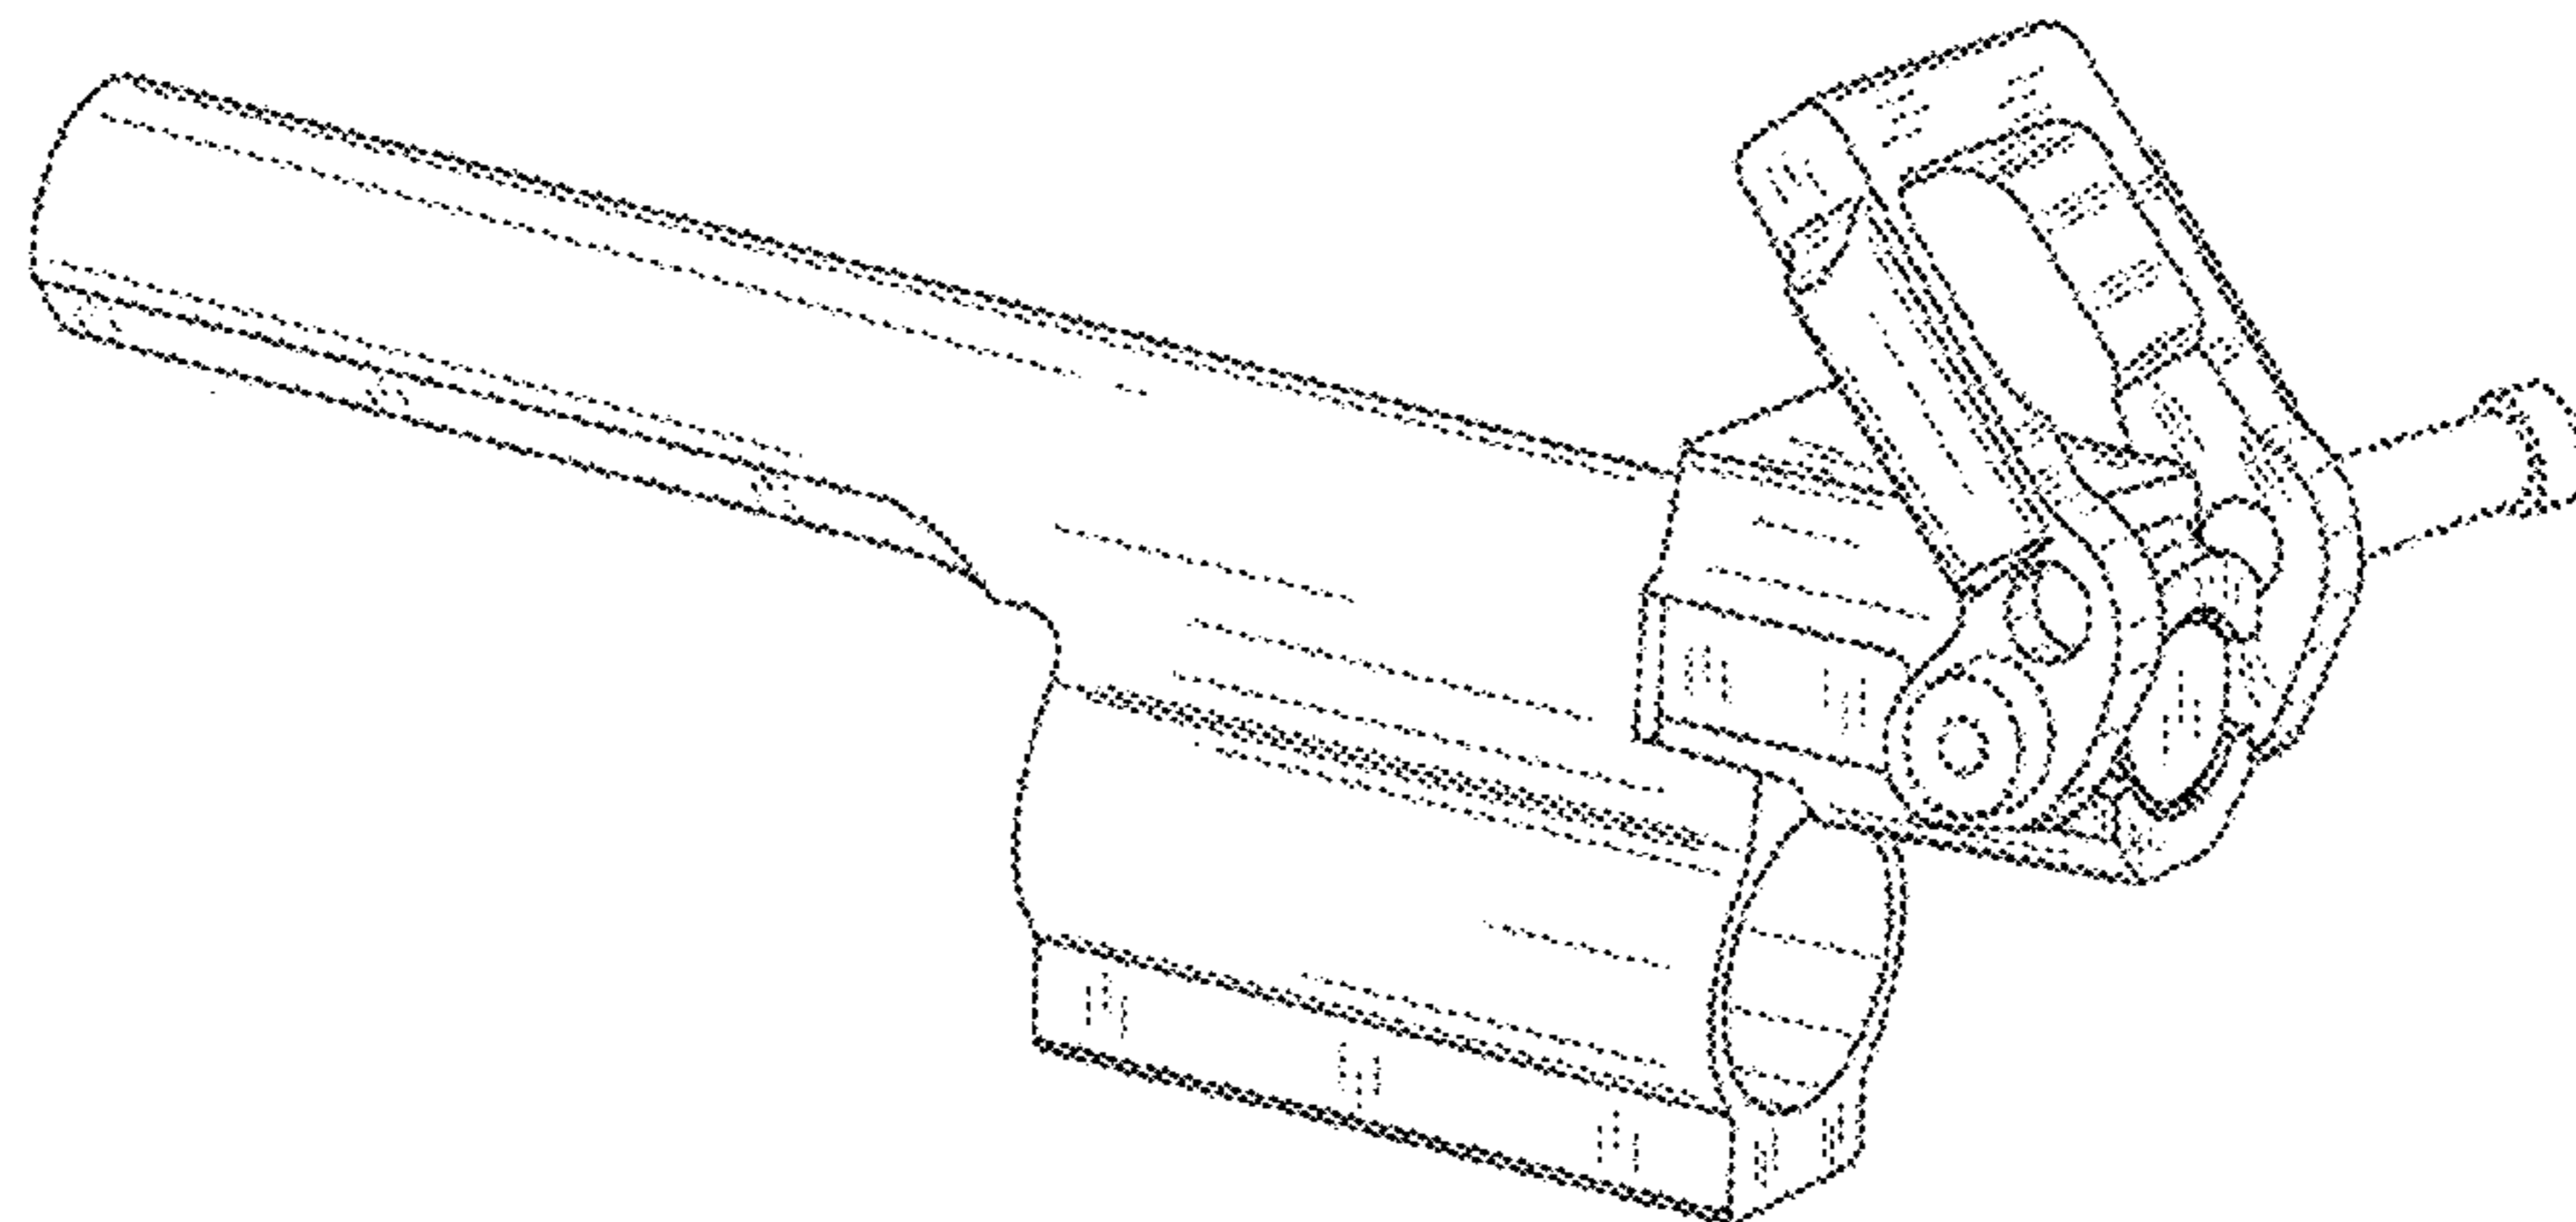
is a rear view of the cam lever bail, gas plug, and gas block of FIG. 8; and,
